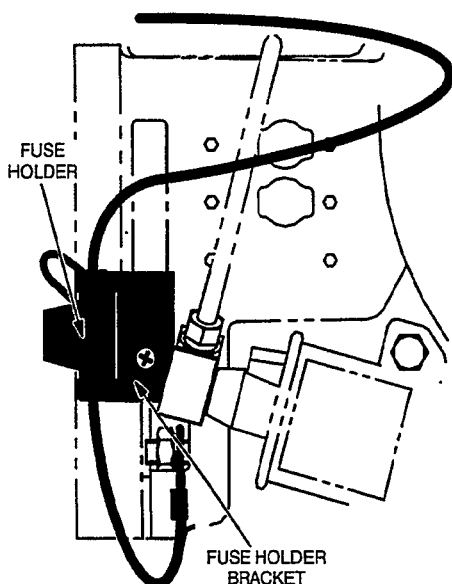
IGNITION/CHOKE FUSE F2 LOCATION
